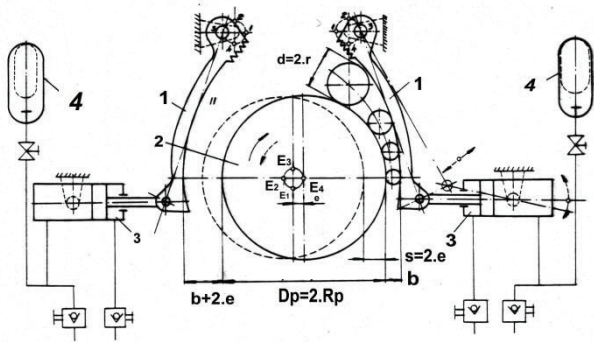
A cinematic sketch of a rotor crusher of an eccentric type and a hydraulically controlled outlet
